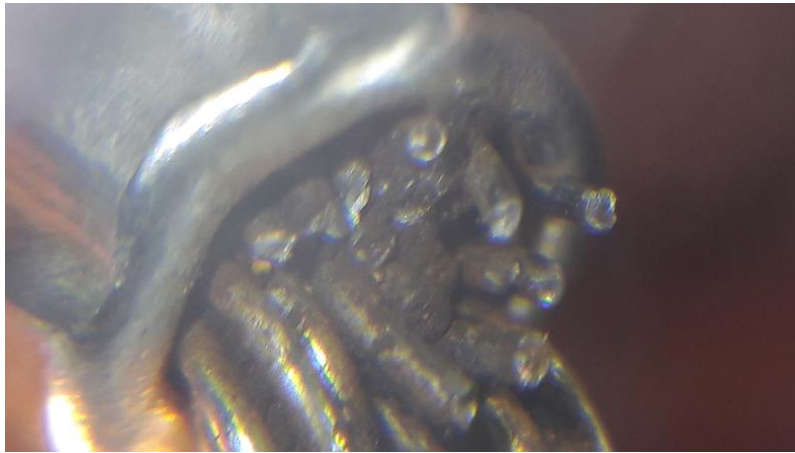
Magnification of edge of the roll-swaged terminal of the partially failed cable. Note dirty surfaces of old failures and corrosion marks especially in the central area, which is hard to inspect externally. Several strands had been broken for some time before the failure.
